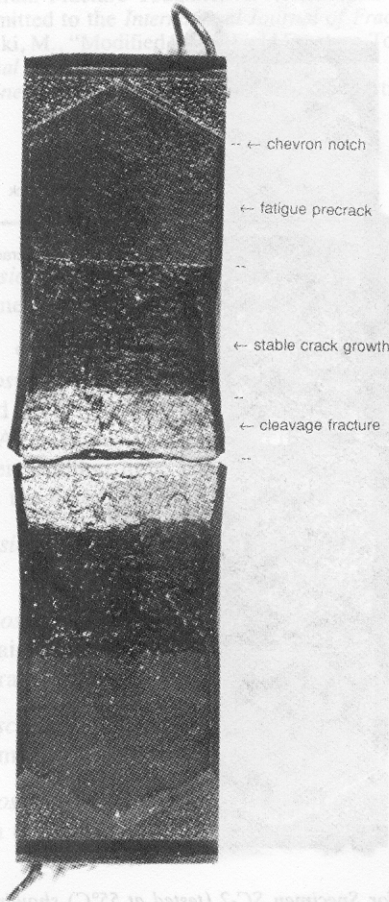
Fracture surface for Specimens NA-3 (tested at 55°C) showing predominant ductile fracture (specimen thickness = 1 cm).
